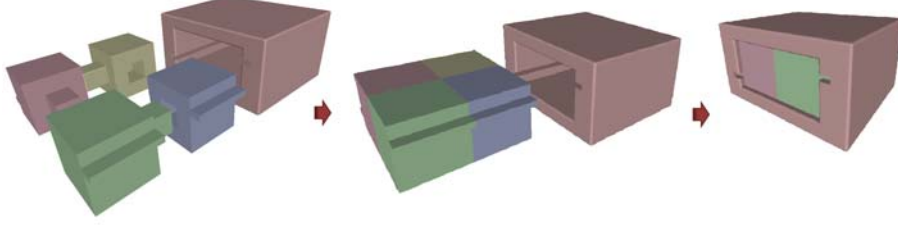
The five-part puzzle used to illustrate how the algorithm deals with nonlinearity: Initially, the four parts form two part sets. Next, they combine to form a single part set, which is finally assembled into the largest part.
